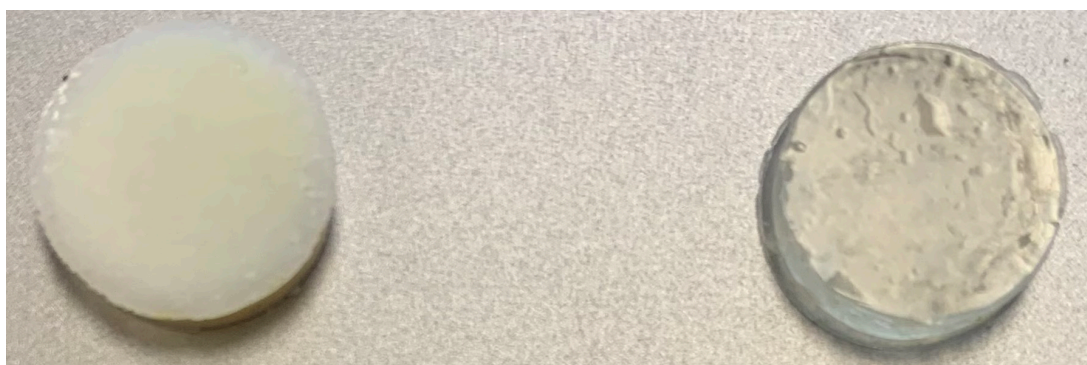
Compression mould formed samples of pure PVC (right) and PVC containing 5% ZnO (left)
